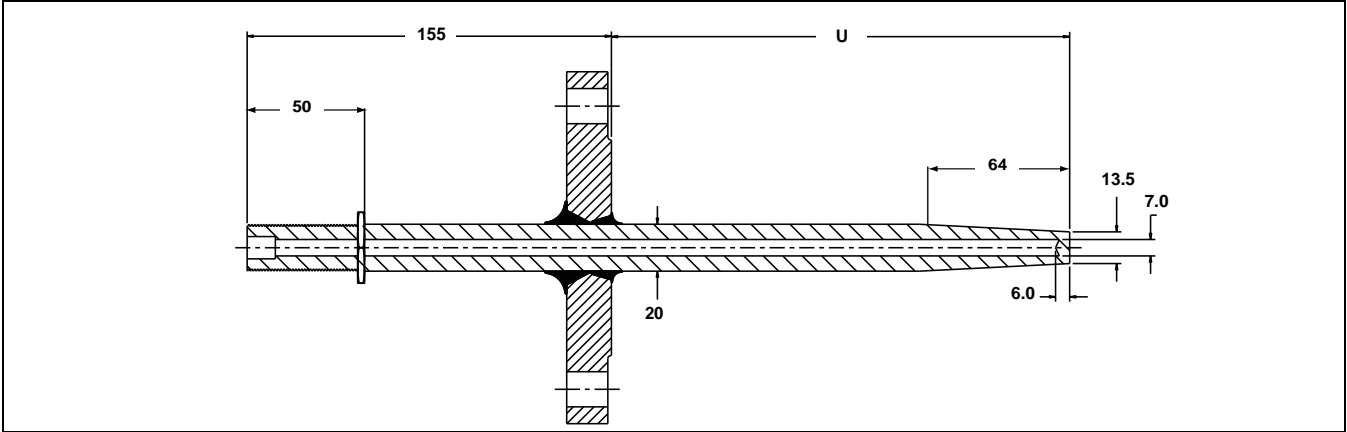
Flanged Barstock Thermowell (3 mm)
